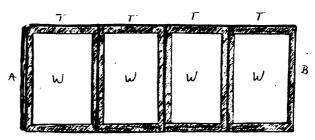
Method of Constructing Folding Lantern. T, T, T, T, tin framework; W, W, W, W, holes forming windows, covered with ruby fabric. The end B fastens to the end A, which is turned over to form a catch.
